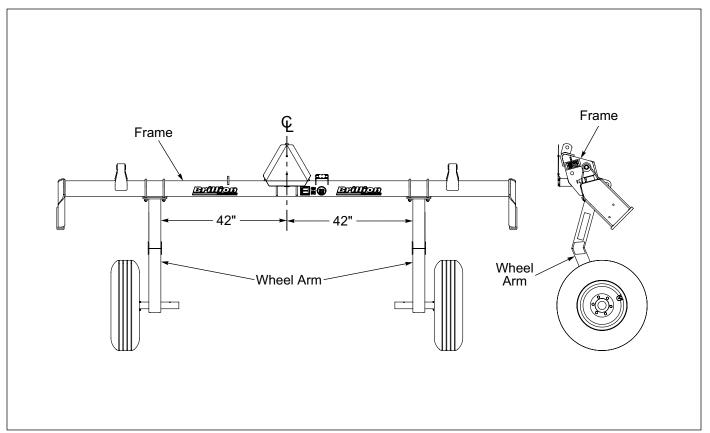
Wheel Arm Mounting Dimensions, 10FT - 16FT Models
